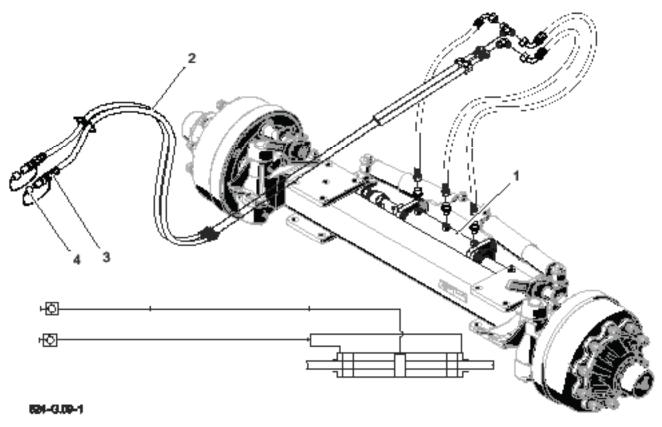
Construction and diagram of the hydraulic steering lock system
